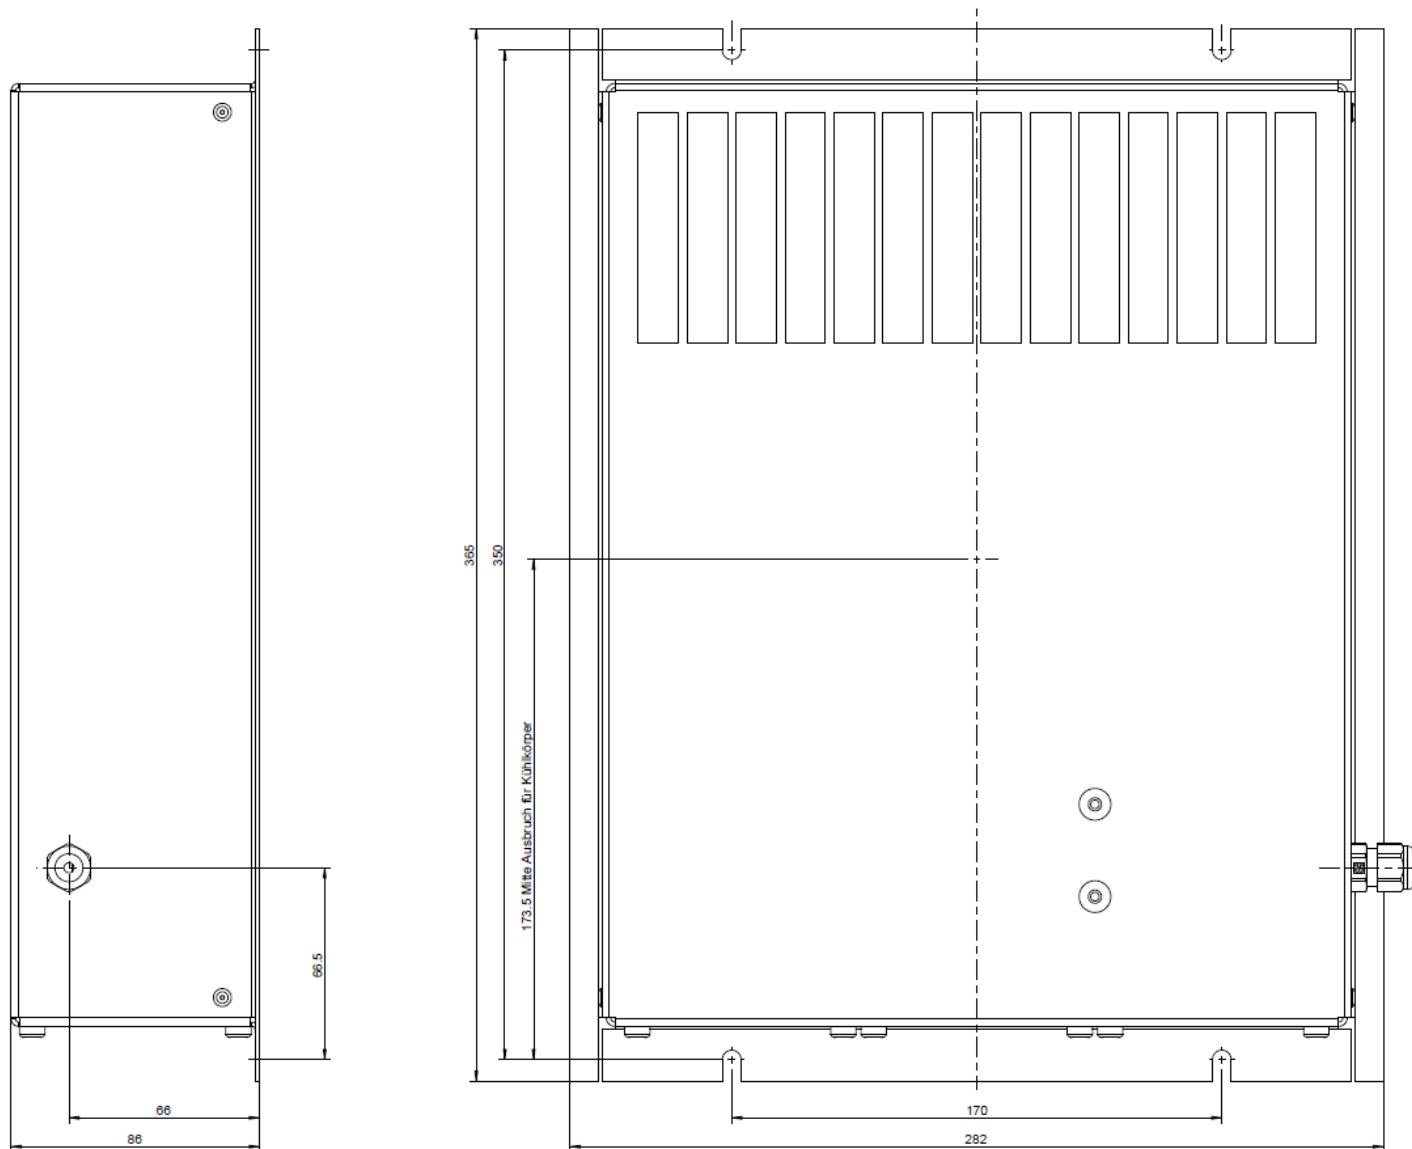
Dimensioned drawings fan cowl, side and rear view
